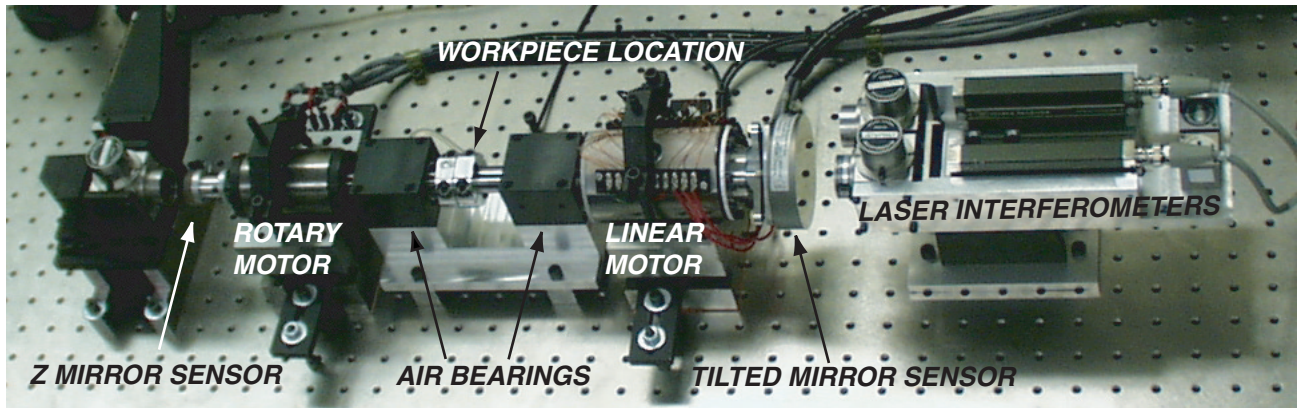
Prototype rotary-linear axis. The axis uses two separate permanent magnet synchronous motors to provide force and torque. On the far left is a 1 inch (2.54 cm) diameter mirror for z measurement, and on the far right is a 3 inch (7.62 cm) diameter slightly tilted mirror for θ measurement.
